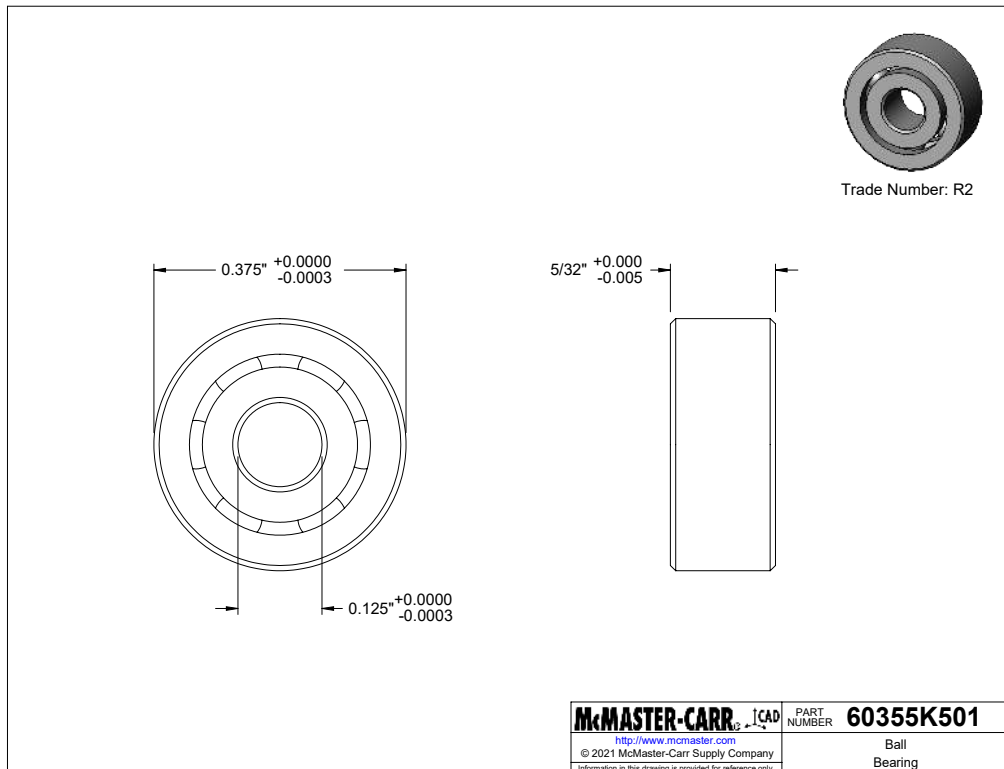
Motor Axle Ball Bearing (Source McMaster [1])
